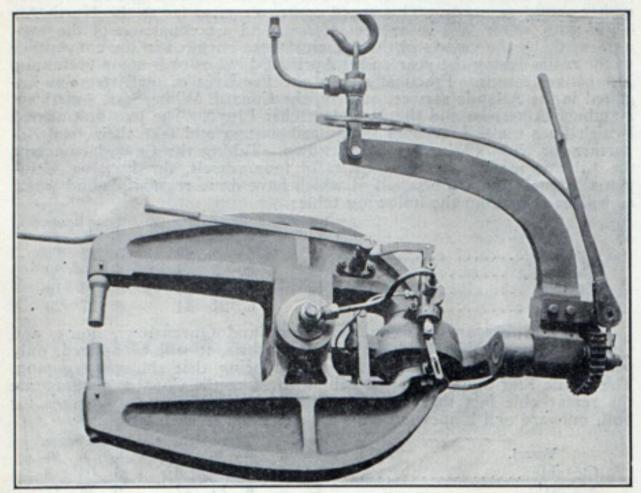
PORTABLE HYDRAULIC RIVETER. HINGED TYPE FOR GENERAL WORK.
